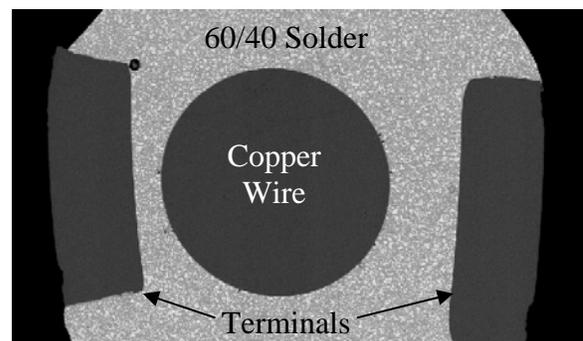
Reflow solder bond created by resistance welding technology.
